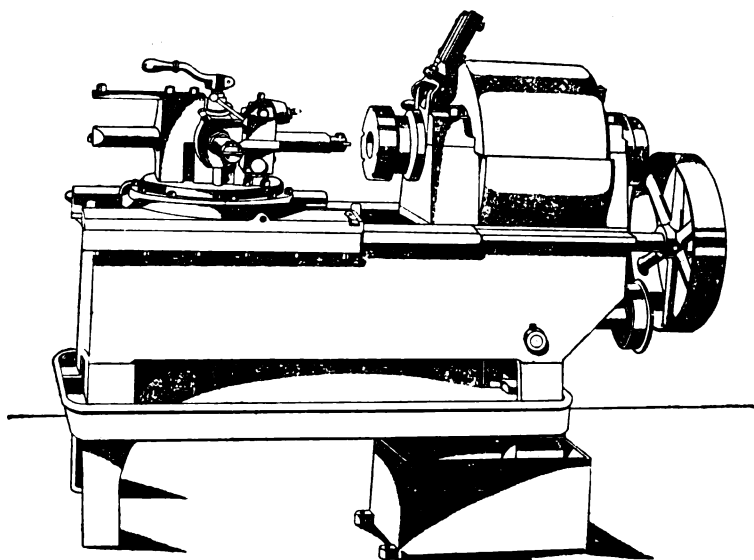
REAR VIEW OF SPECIAL CHUCKING LATHE
